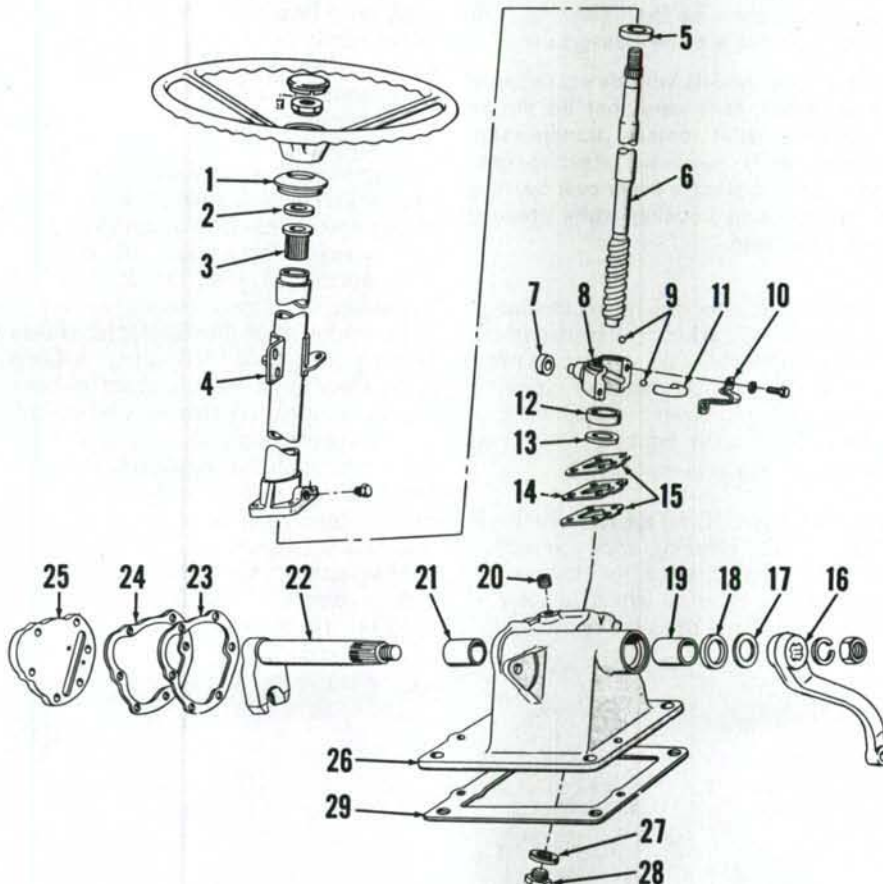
Exploded view of steering gear unit of the type used on all manual steering models and on early 5100 models with power steering. Thirty-four 3/8-inch (9.53 mm) diameter steel balls are used in the assembly; 20 are used for steering shaft bearings and 14 are used in the ball nut (8) and tube (11) recirculating groove. Parts 27, 28 and 29 are not used on Models 5600, 5610, 6600, 6610, 7600 and 7610.
